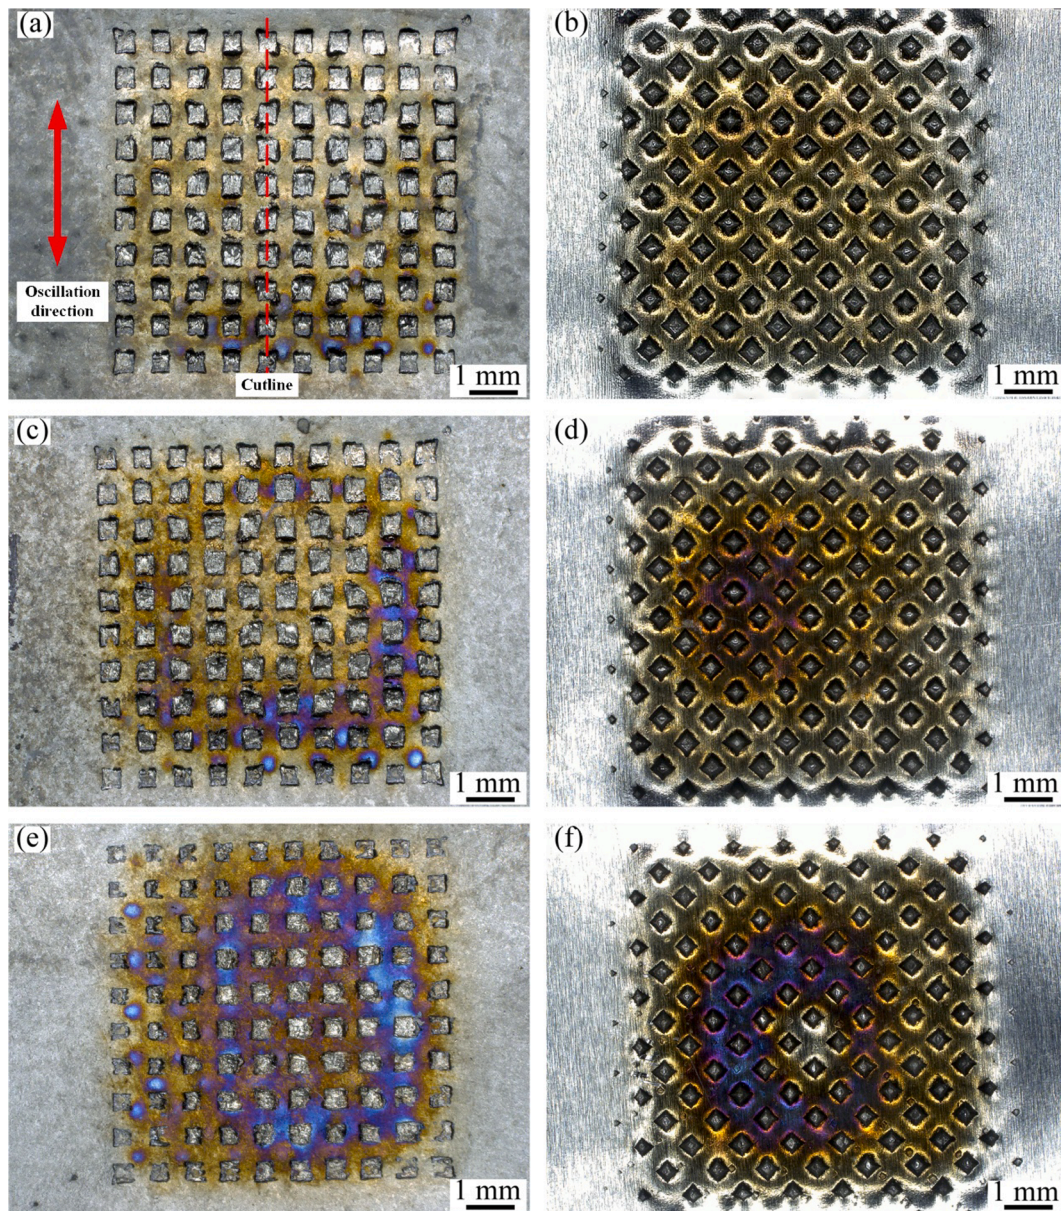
Surface morphology of welded specimens at different welding energy: (a) and (b) top and bottom under 500 J, (c) and (d) 750 J, (e) and (f) 1000 J.
